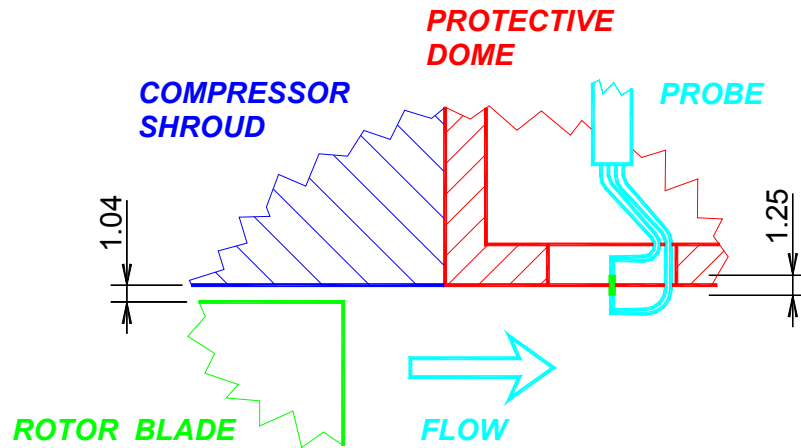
View of split-fiber probe and blade tip clearance (dimensions in mm).
